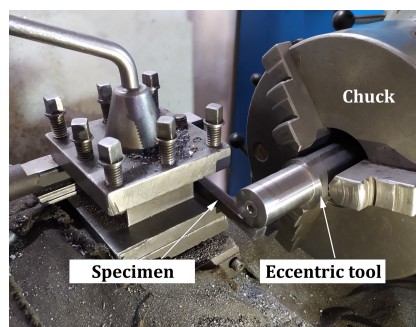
VSR treatment being performed on sample using eccentric tool clamped in the spindle
